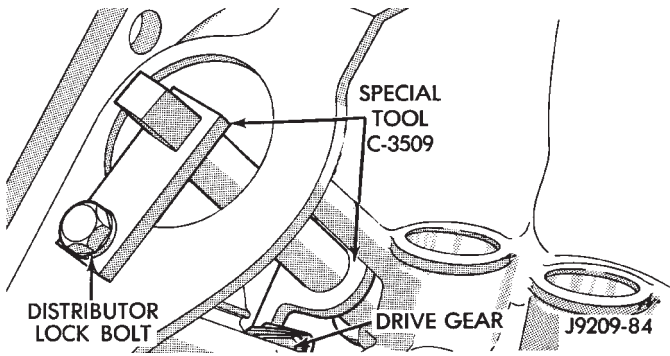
Camshaft Holding Tool C-3509 (Installed Position)
